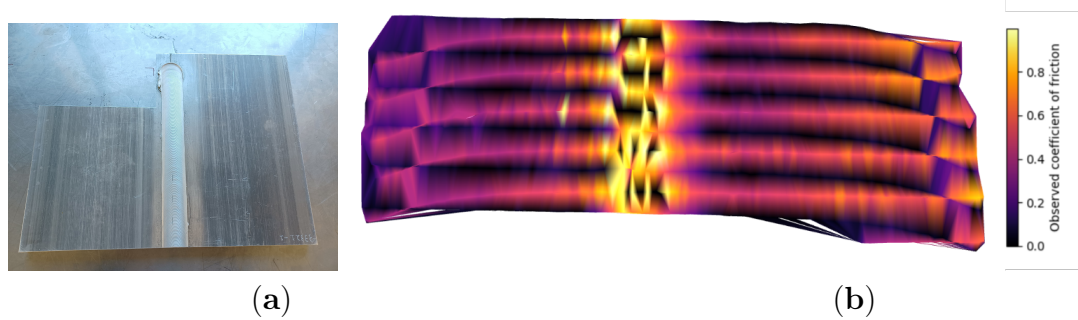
Friction analysis of a friction-stir weld shows that measuring the surface-friction can indicate discontinuities in the surface. The upper section presented a sharpened lip, avoided for the safety of the wedge. (a) Colour image of the welding plate. The lower half of the plate was scanned as part of this analysis. (b) Friction coefficient encountered as a heat-map over the surface. The accuracy of the frictional values is determined by the size and shape of the wedge's surface—in this case, 25×25 mm.
